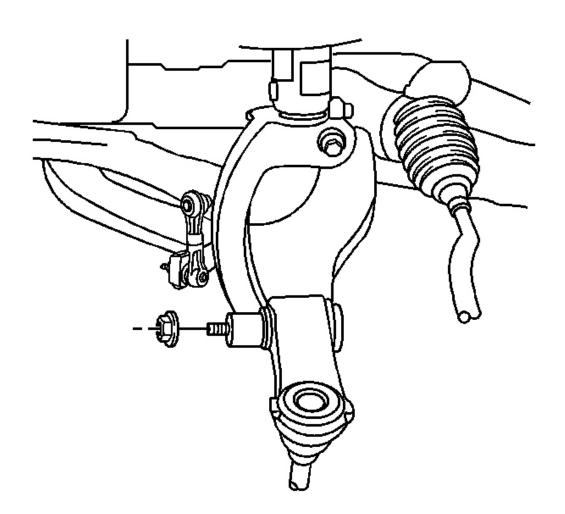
Removing/Installing Shock Module Yoke Lower Mounting Nut Courtesy of GENERAL MOTORS CORP.
